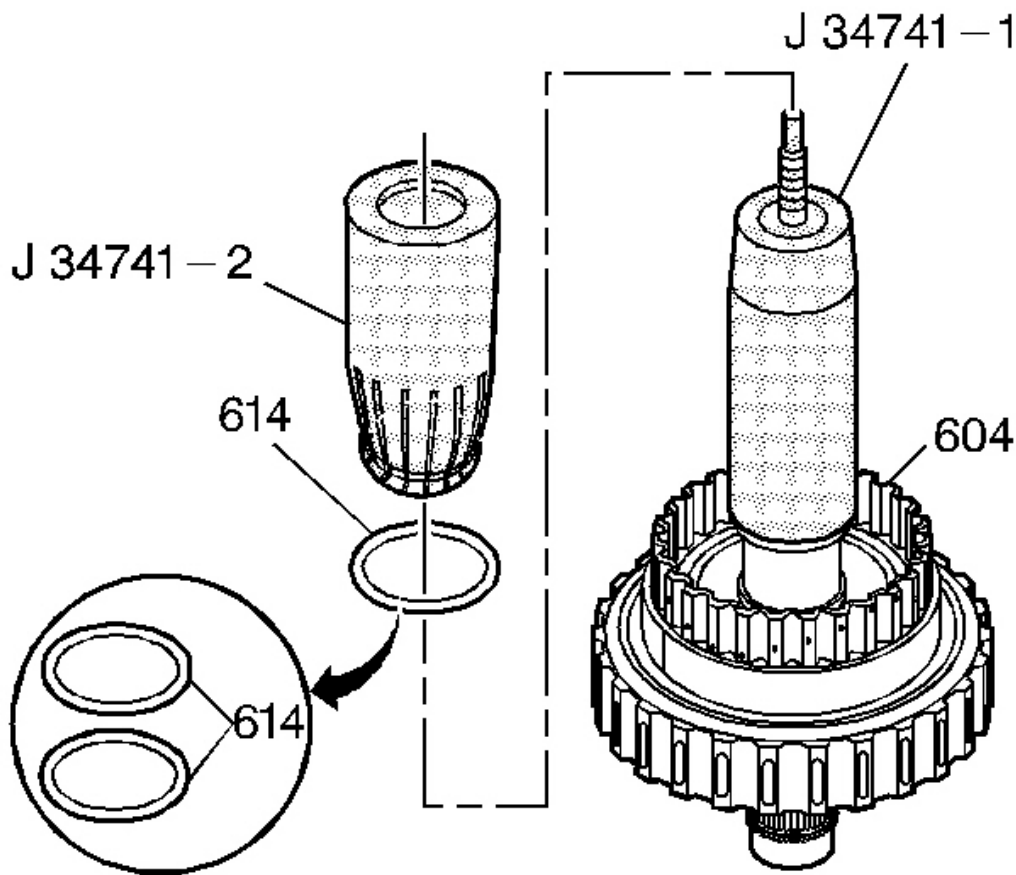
Installing Oil Seal Rings Using J 34741-1
